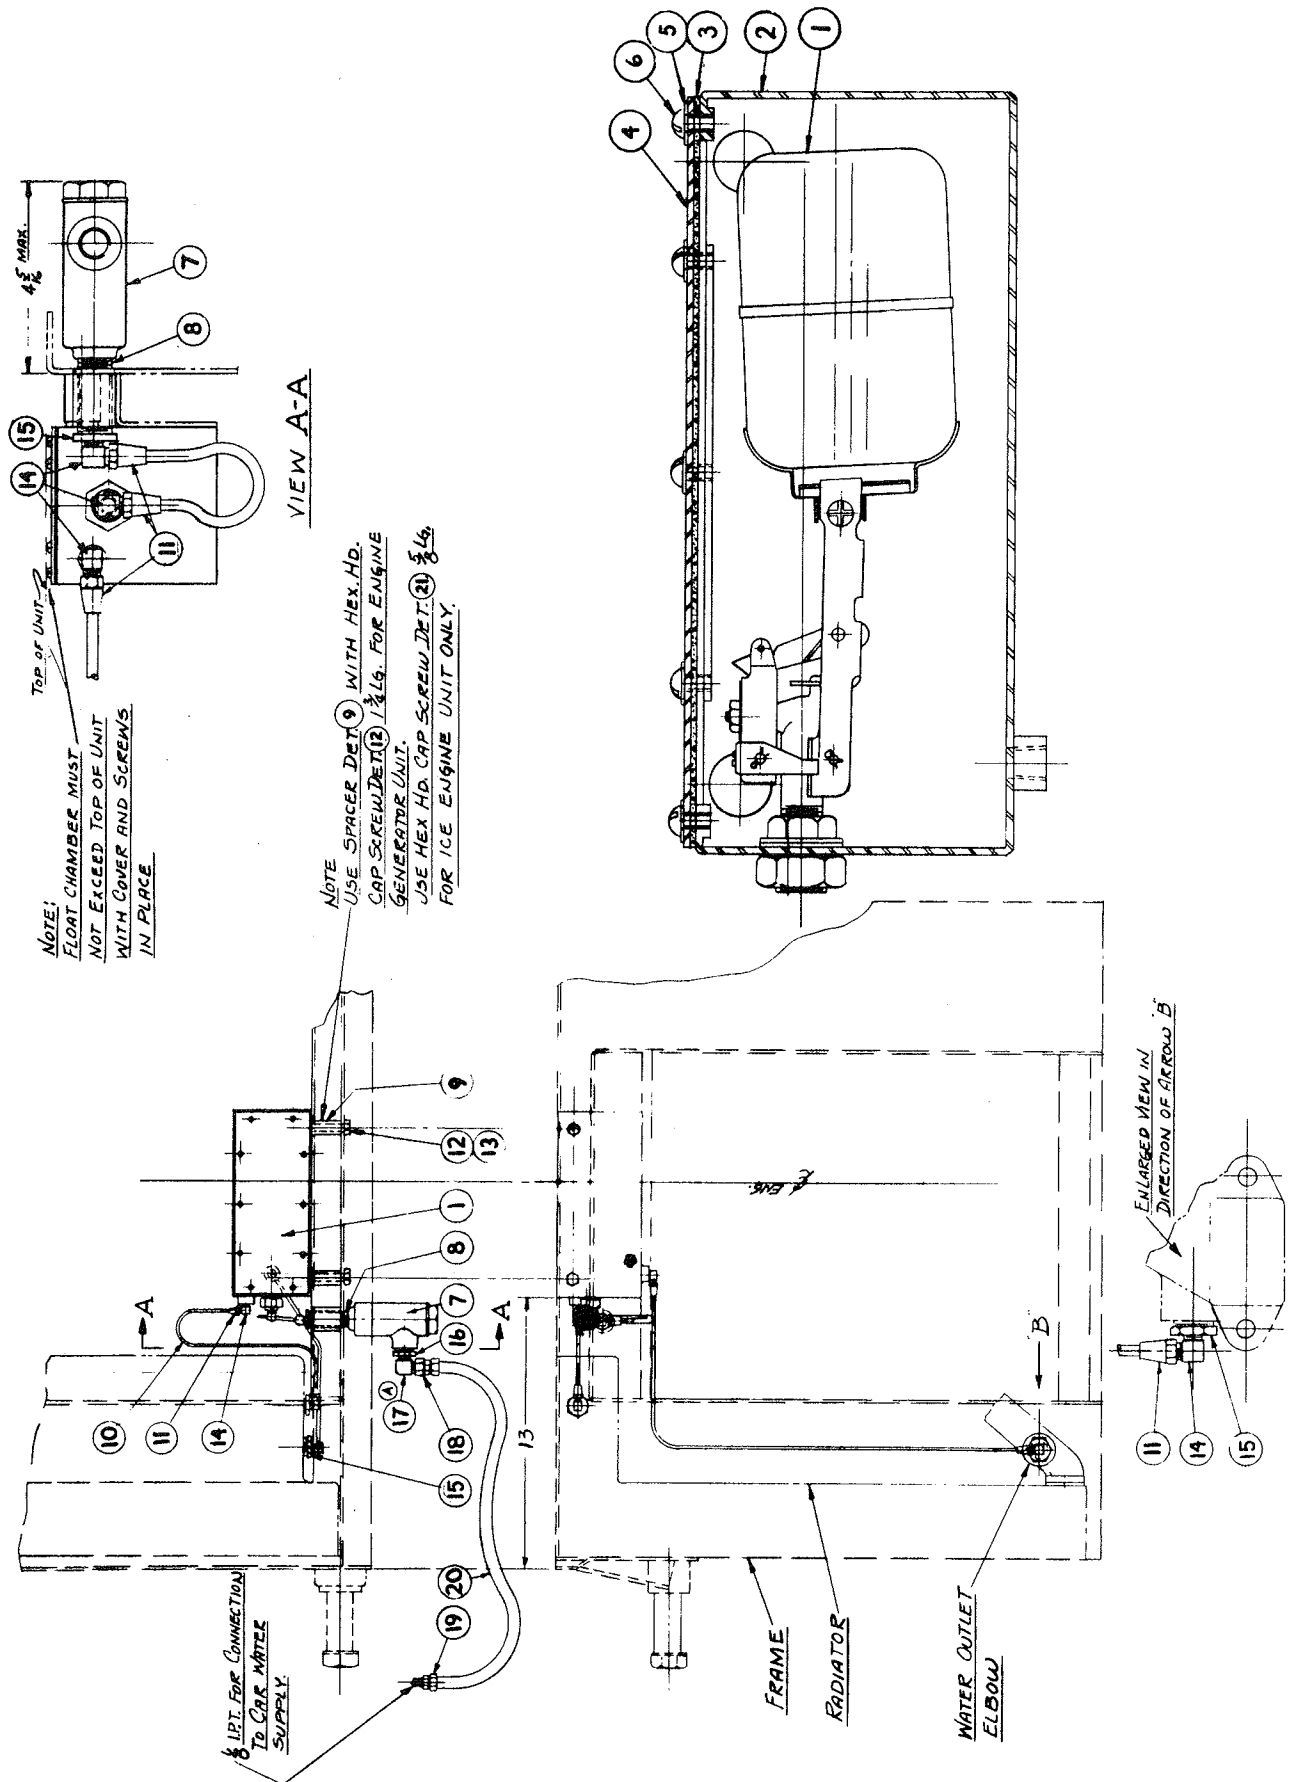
AUTOMATIC RADIATOR WATER FILLER ASSEMBLY
